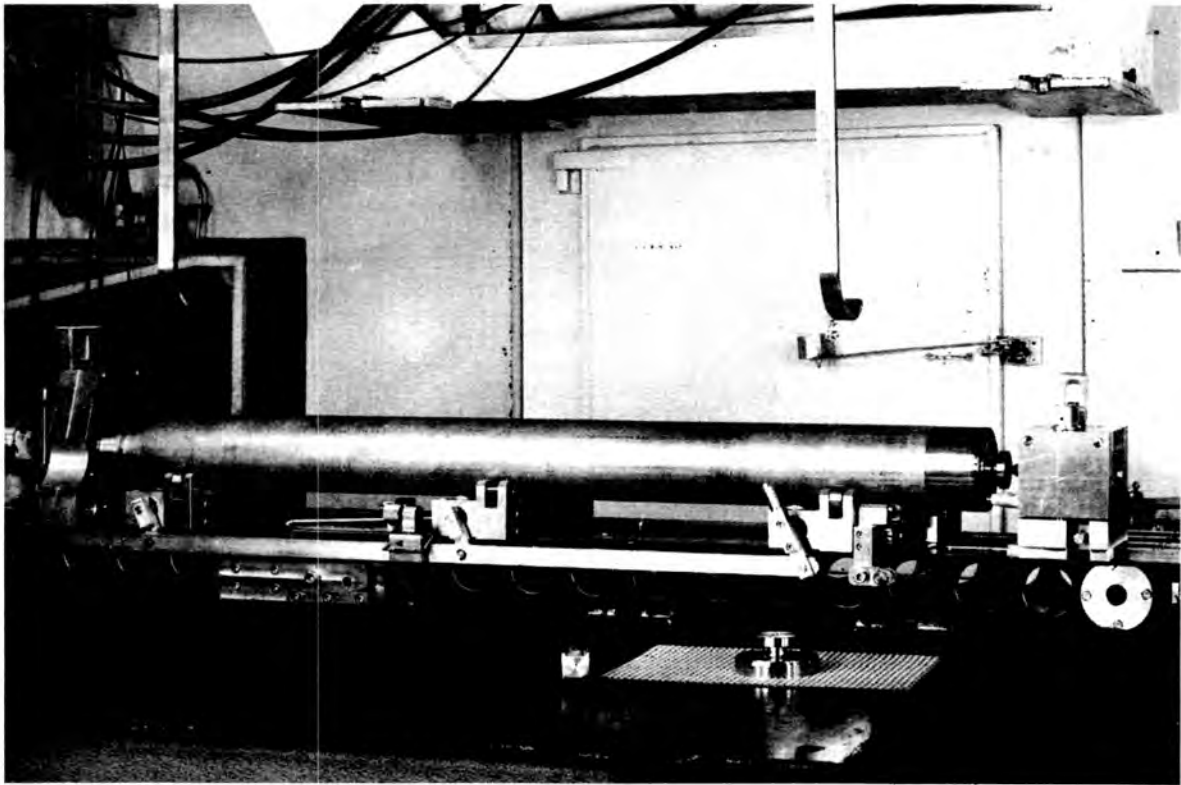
The Set-Up for Welding the Top Lid of the Canisters.
